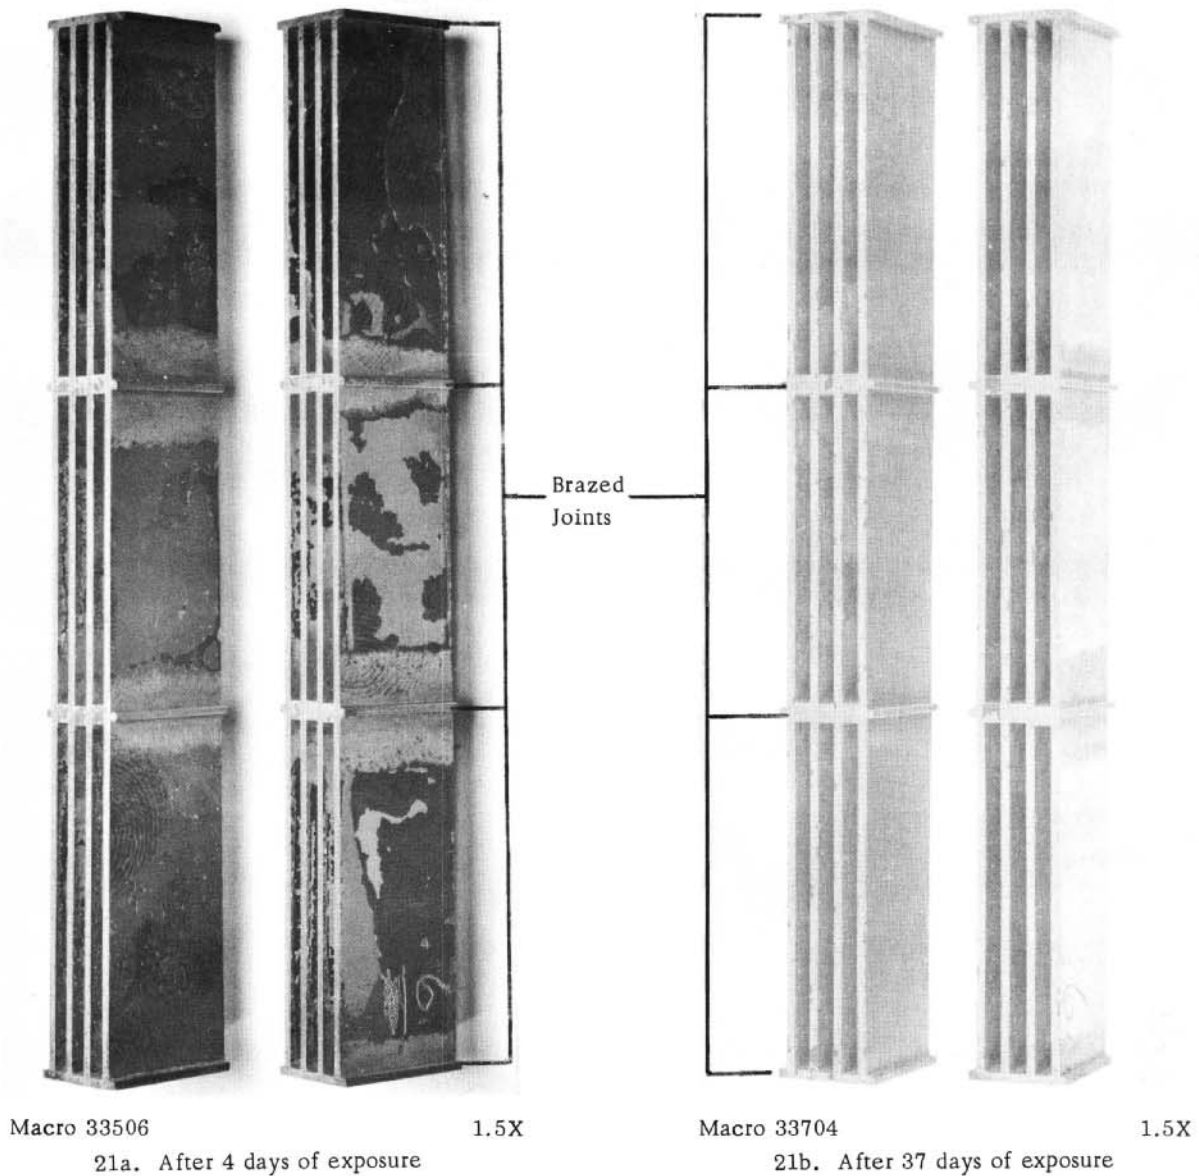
Brazed (Coast Metals 60) Depleted Fuel-subassembly Sections after Corrosion Testing in 650°C, 42.2 kg/cm² (600 psi), Oxygenated Steam
